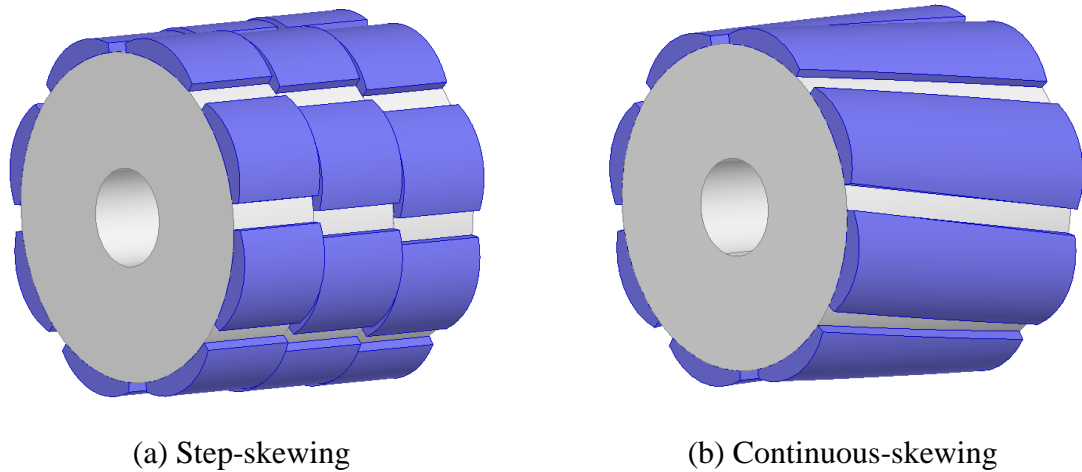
Skewing methods in SPM machines [BIA02].
